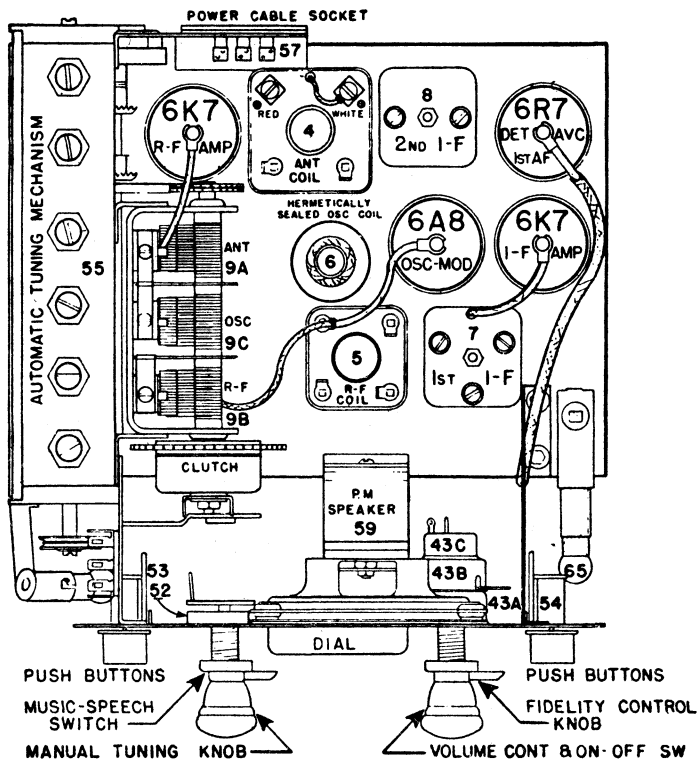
PARTS LAYOUT--I.P. UNIT--Top View
